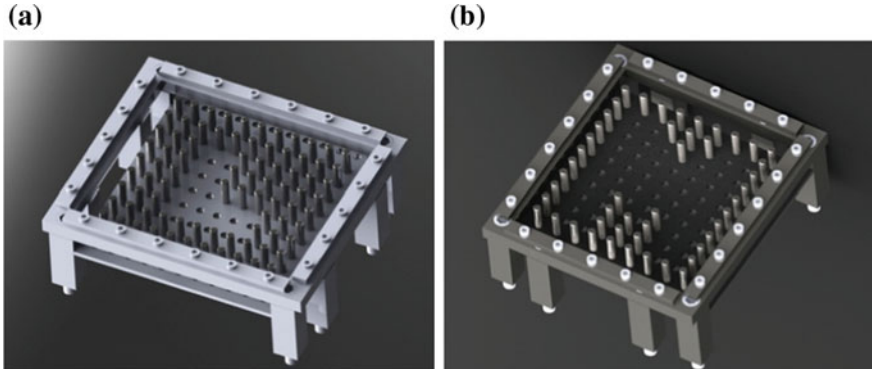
CAD model of bolt supports arrangement. a L shape. b M shape
